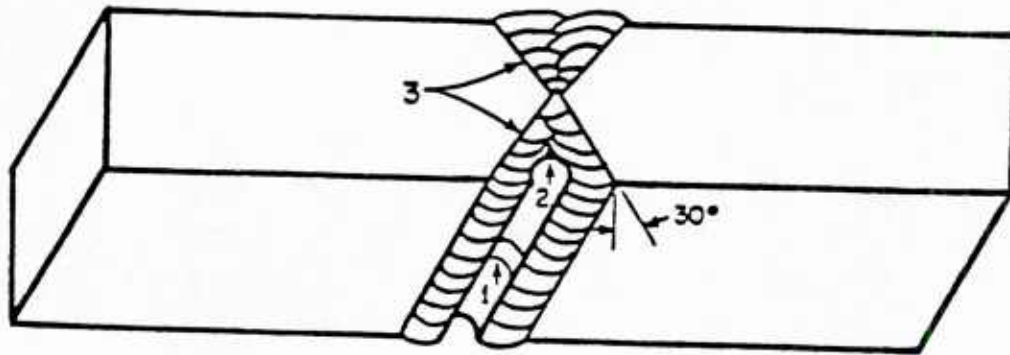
SPECIMEN USED FOR BLAST INDUCED FRACTURE
